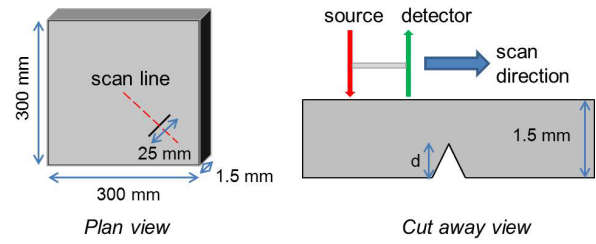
A schematic diagram showing scanning laser detection inspection of laser micro-machined defects of depth d in 1.5 mm thick aluminium sheets.
